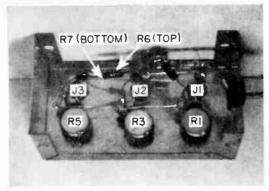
With the bottom cover removed, the simple wiring and facile parts placement becomes obvious.
